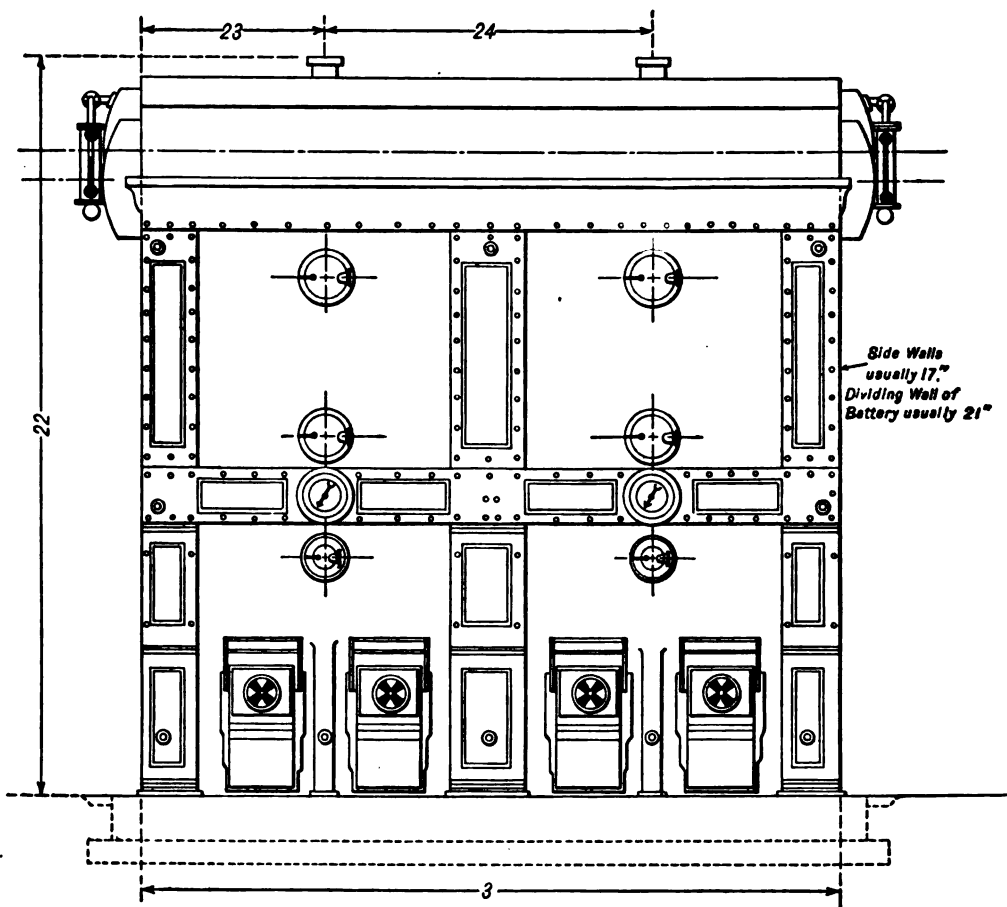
DIMENSIONS OF THE STIRLING BOILER.
